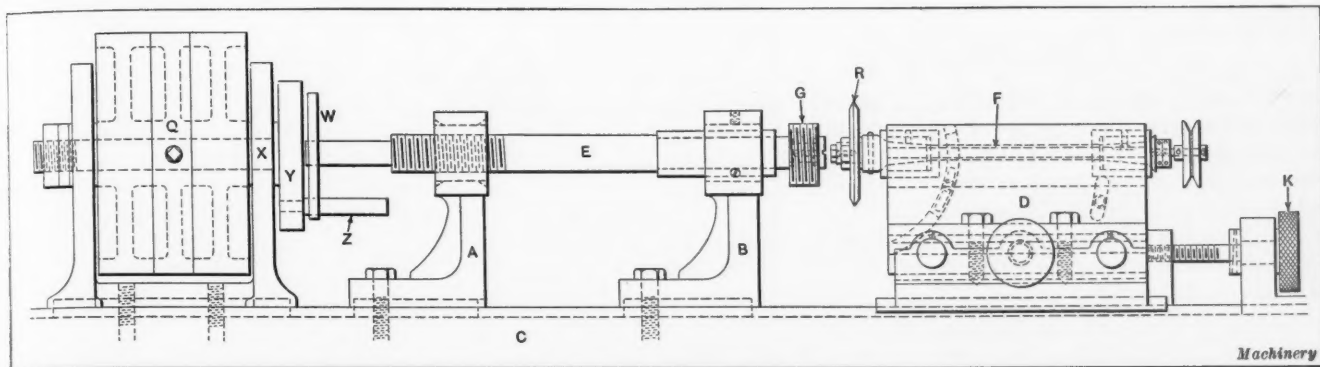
Special Machine used for grinding Gage Threads Preparatory to Lapping Operation
